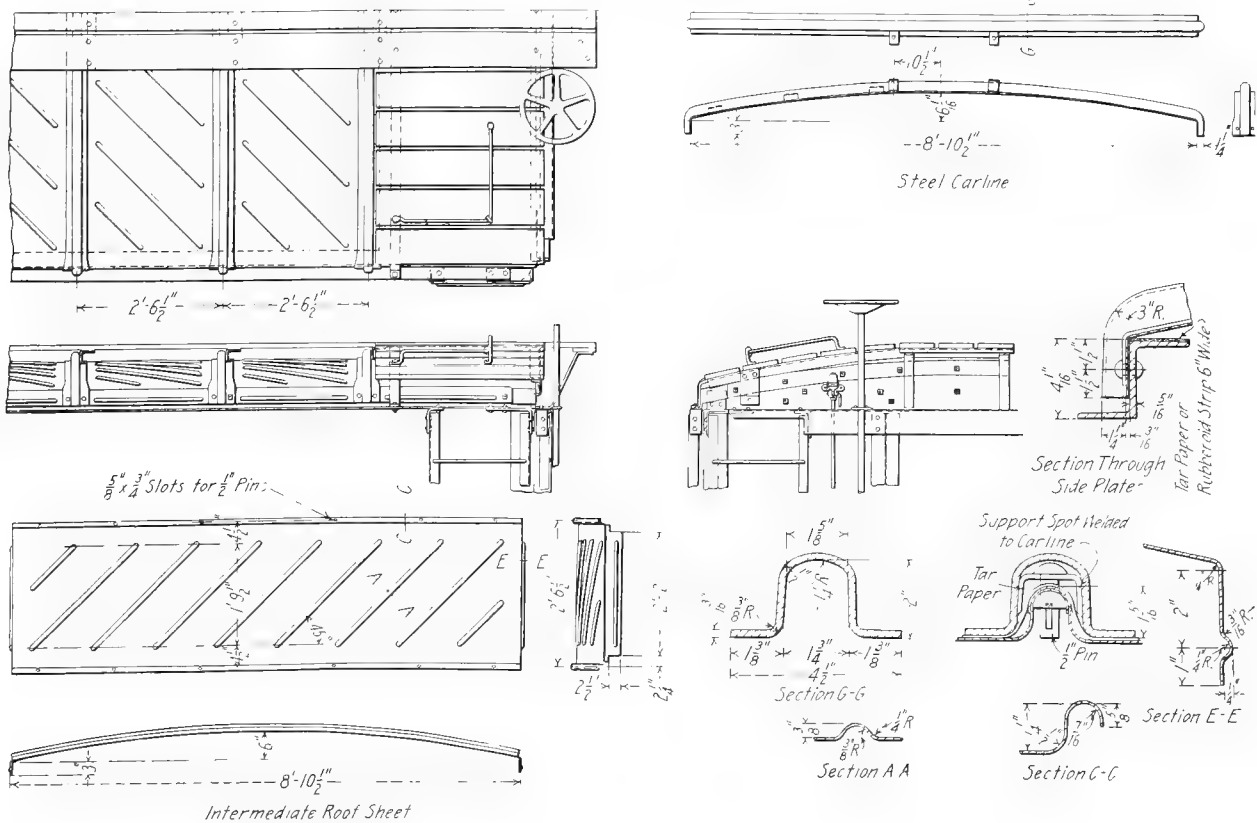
Hutchins Camber All-Steel Roof. Hutchins Car Roofing Company.
